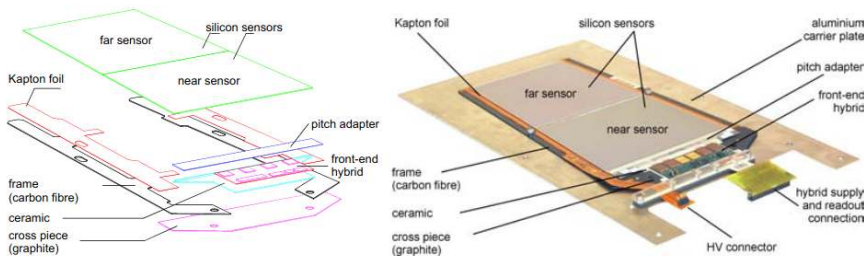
| Exploded view of a module housing two sensors (left) and a photograph of a TEC ring 6 module, mounted on a carrier plate (right). From Ref. [20].
